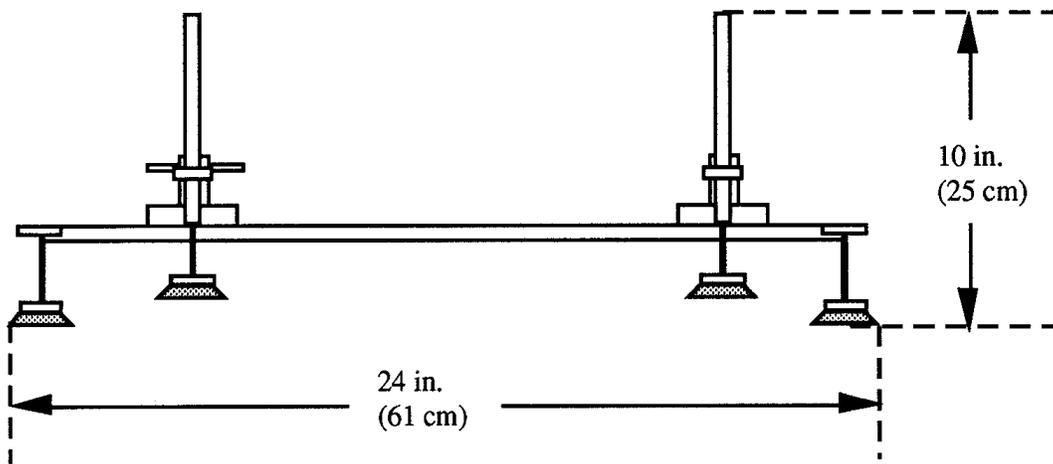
ROBOT DIMENSIONS (SIDE VIEW)
